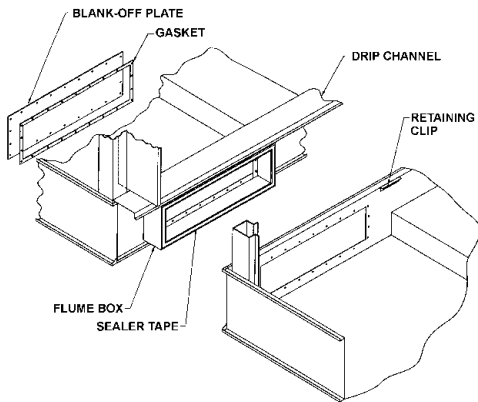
Optional Blank-Off Plate on the Equalizer Flume.
